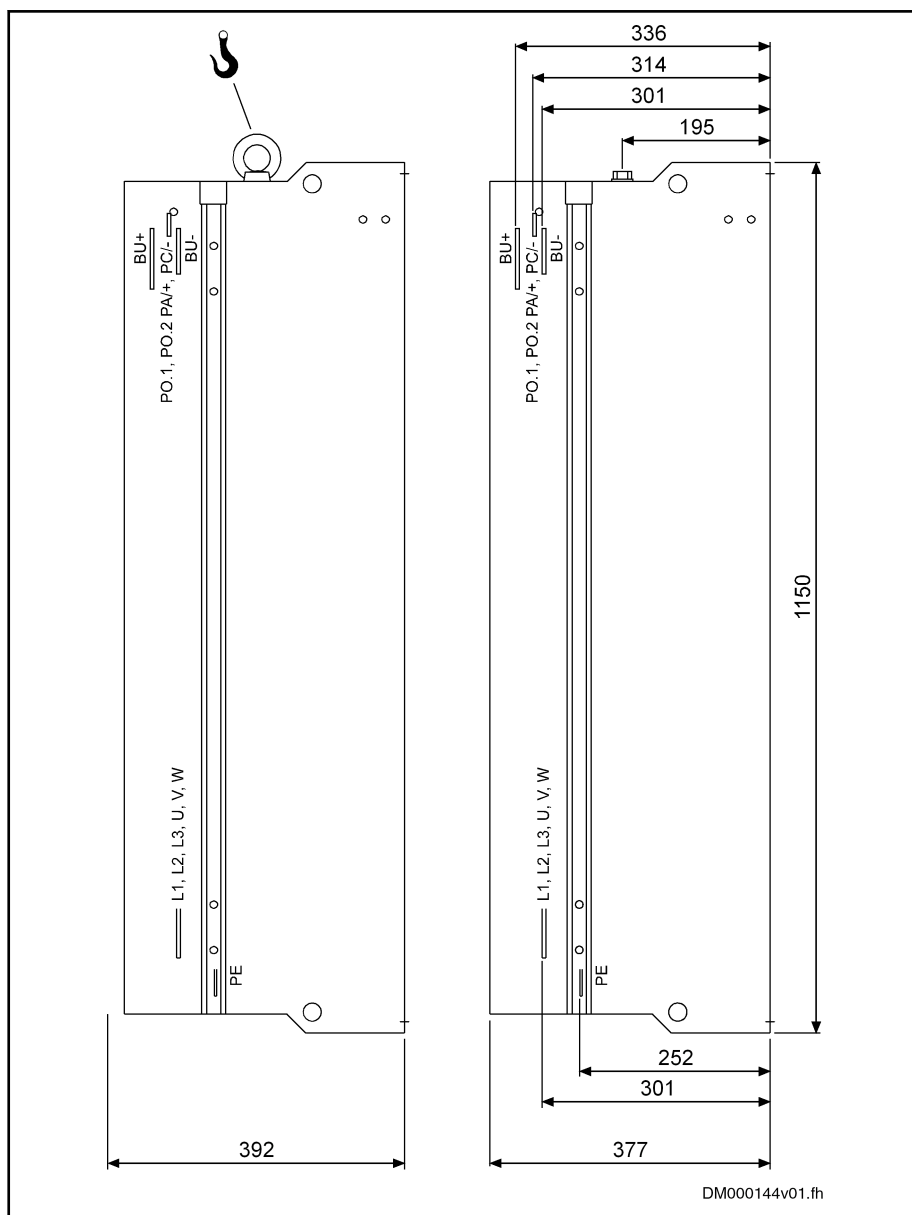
Dimensions IndraDrive HCS04.2E-W1240
